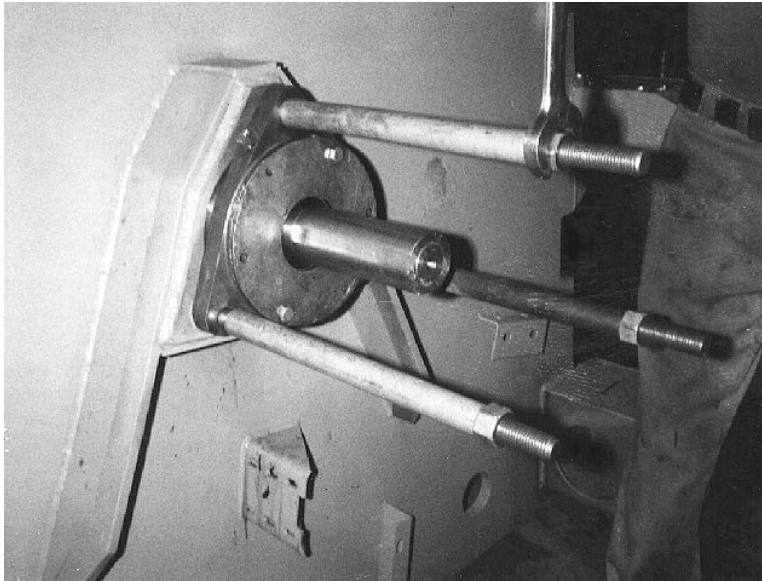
Pushing the Bearing Housing into the Shell (60" Rapid-load machine shown)
